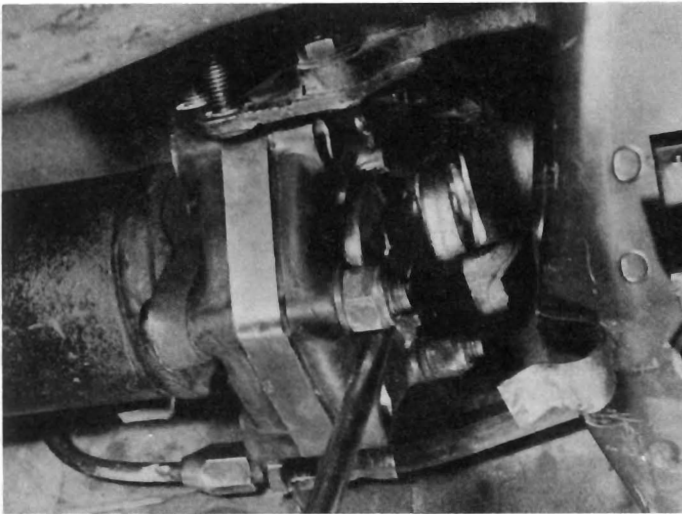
Removing the propeller shaft from under the car (Sec 2)
